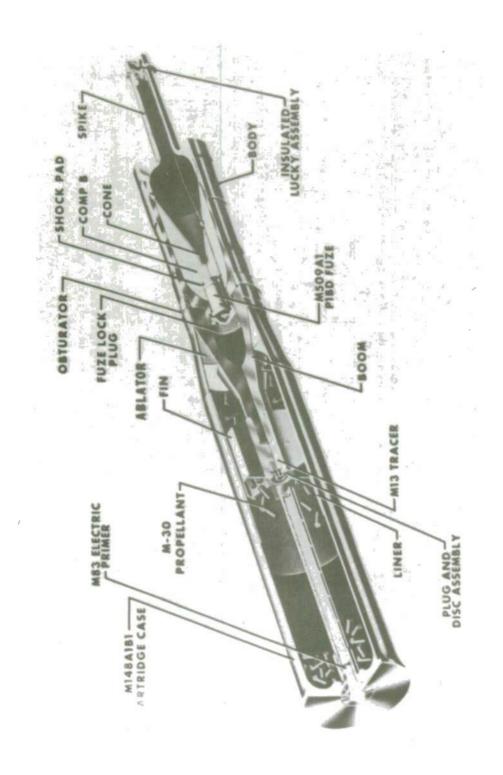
105mm M456 HEAT-T Cartridge, cross-section view
